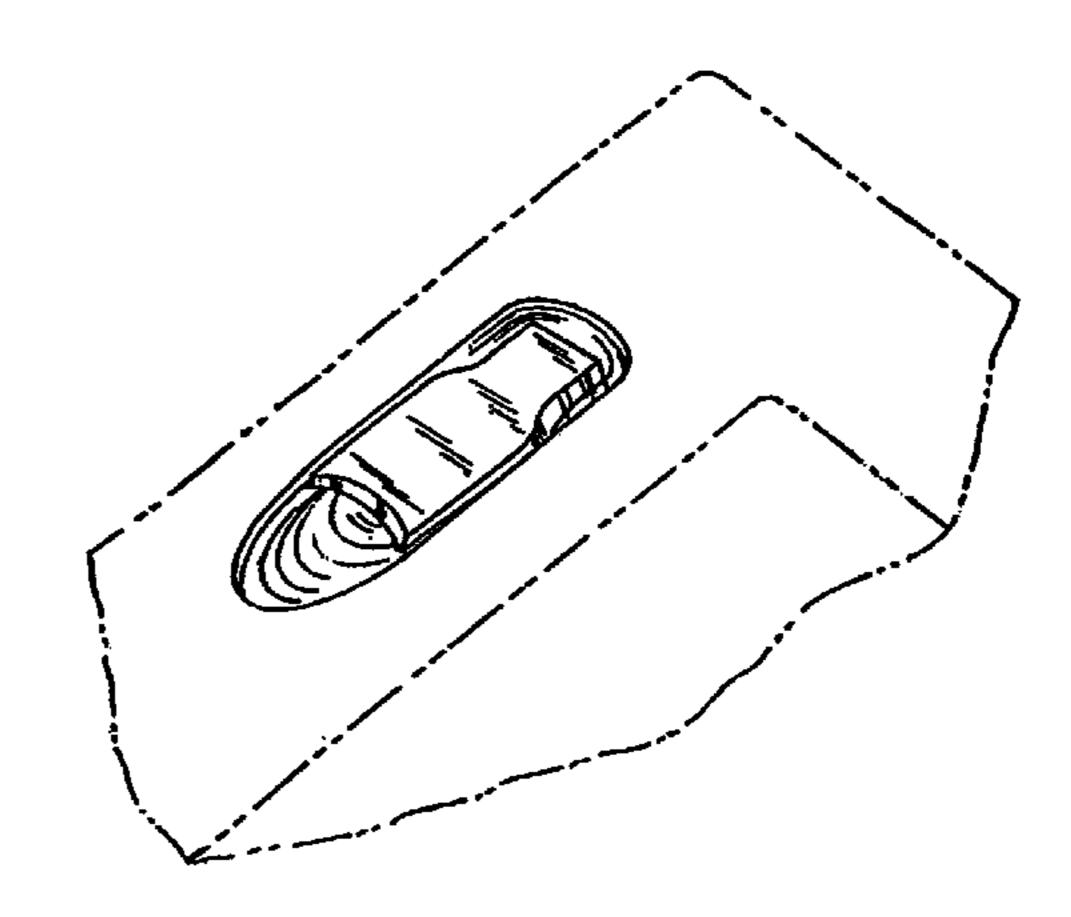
is an enlarged front elevation view of the latch handle of FIG. 2; and,
